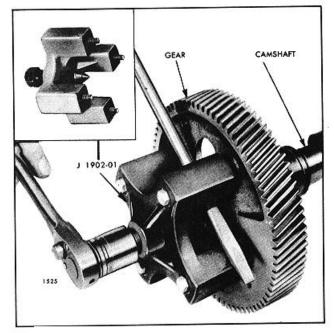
Removing Gear (Camshaft or Balance Shaft)
